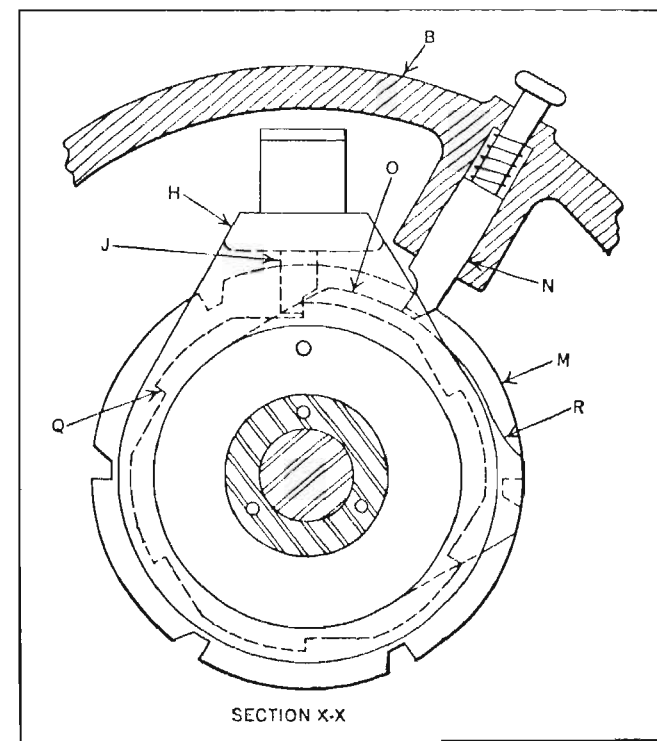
Cross-section of Indexing Mechanism, Fig. 23, Showing Action of Locking Cam
